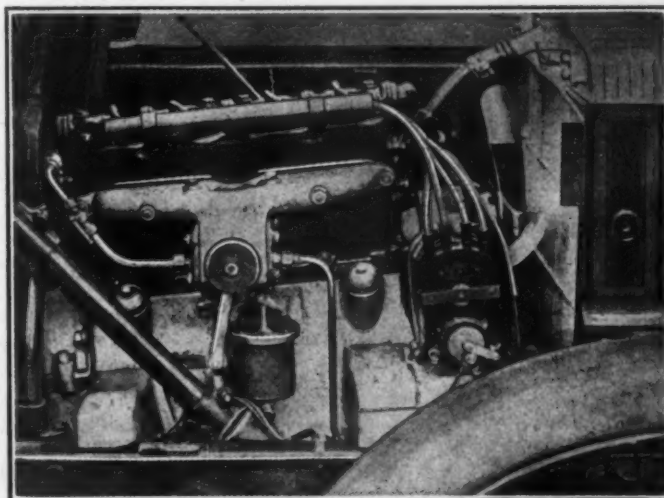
Intake side view of Knight engine, showing clean intake manifold, accessibility of magneto and water connections to carburetor
